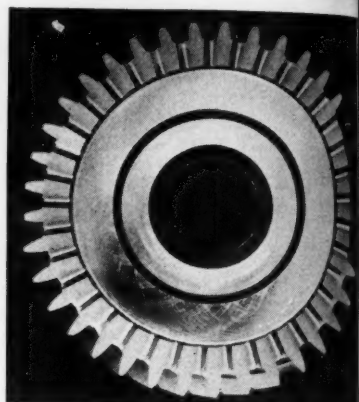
Gap-type Gear Shaper cutters for roughing and finishing helical pinions in one operation.
